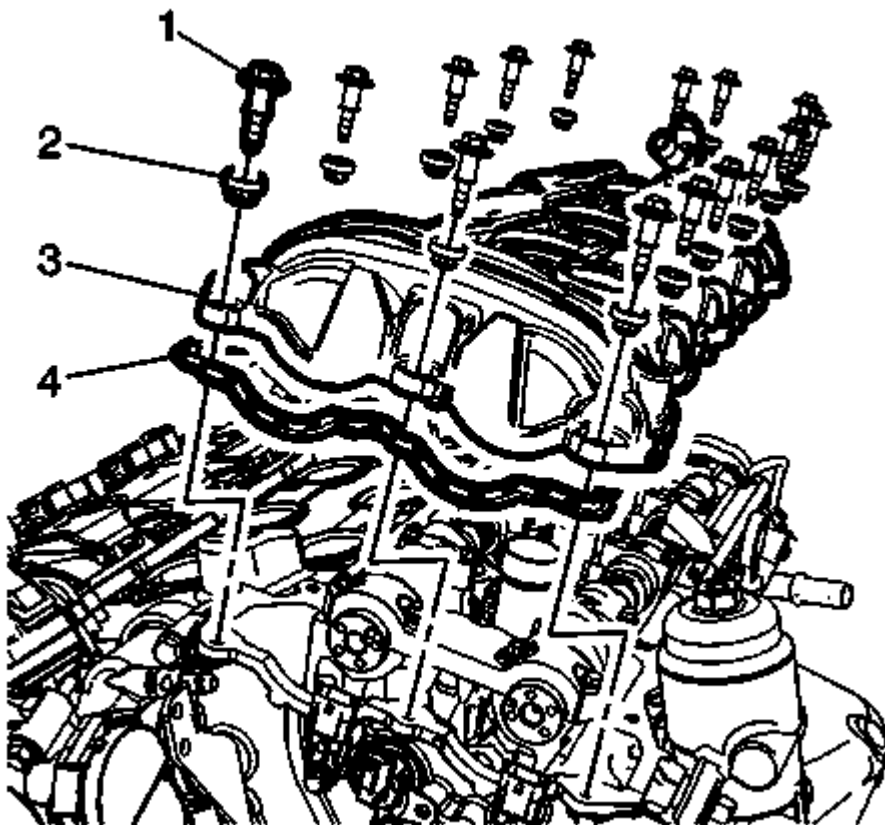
Camshaft Cover, Gasket & Retaining Bolts
